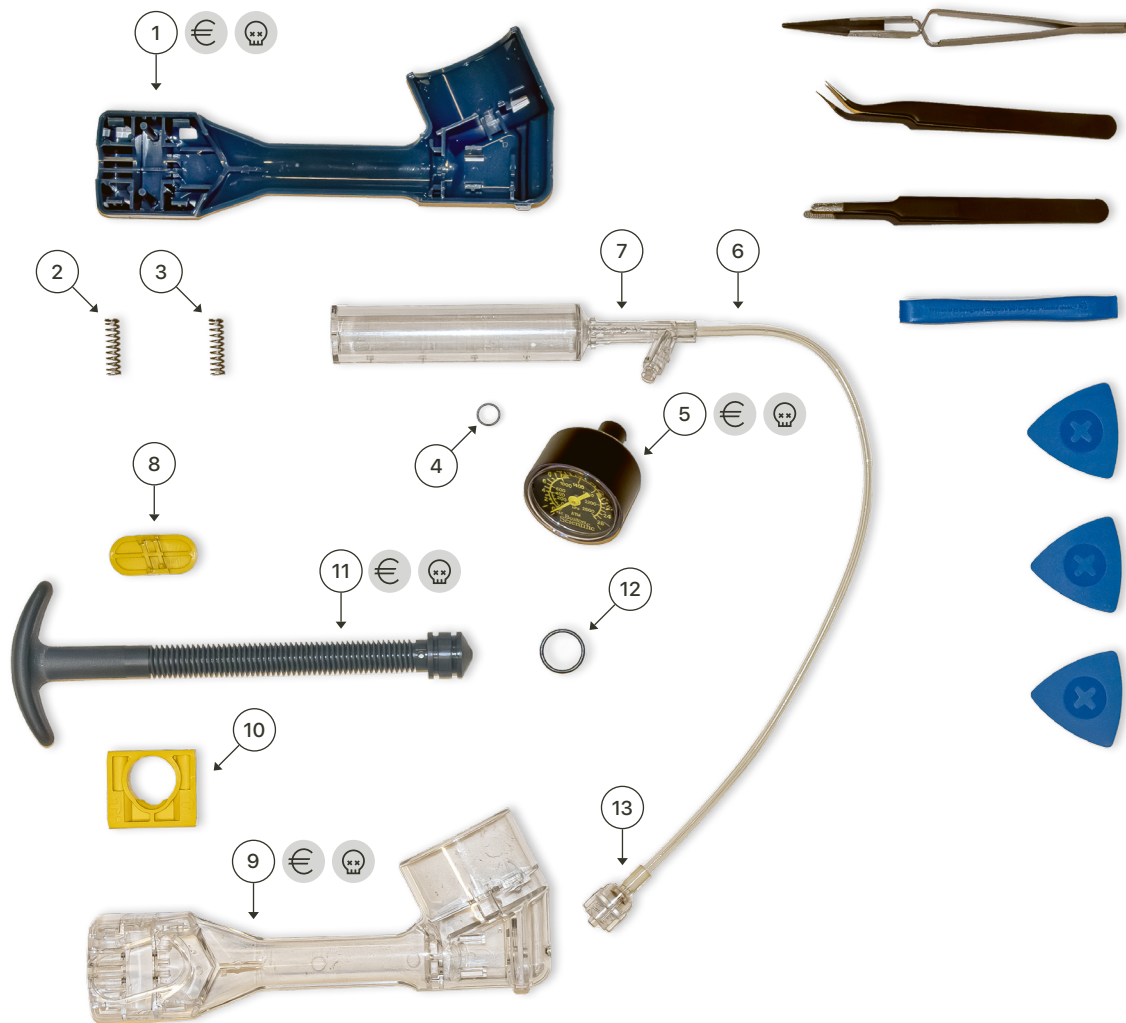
Disassembled Encore™ 26 inflator. The parts are numbered following the part list included in Figure 39, and the environmental and economic hotspots are highlighted.
